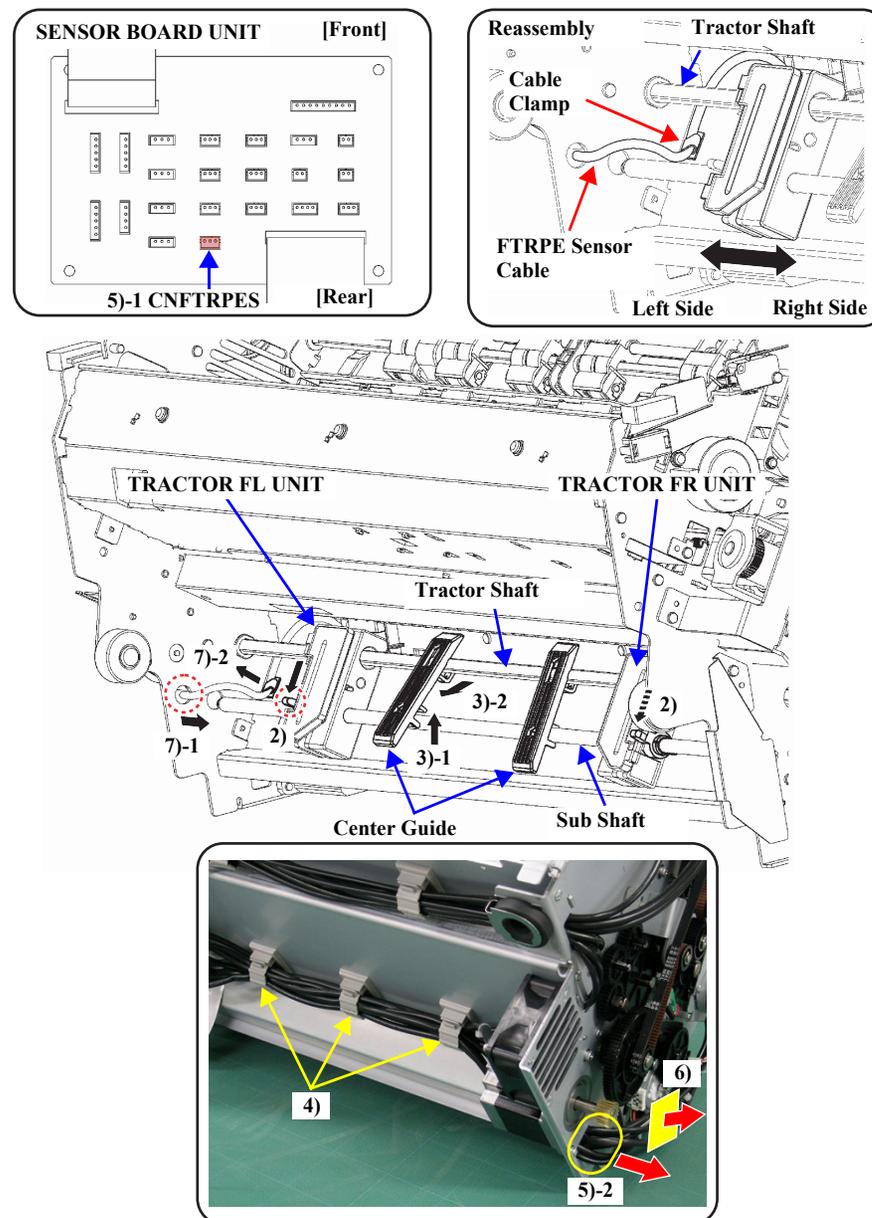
TRACTOR FL UNIT/TRACTOR FR UNIT Removal (1)
